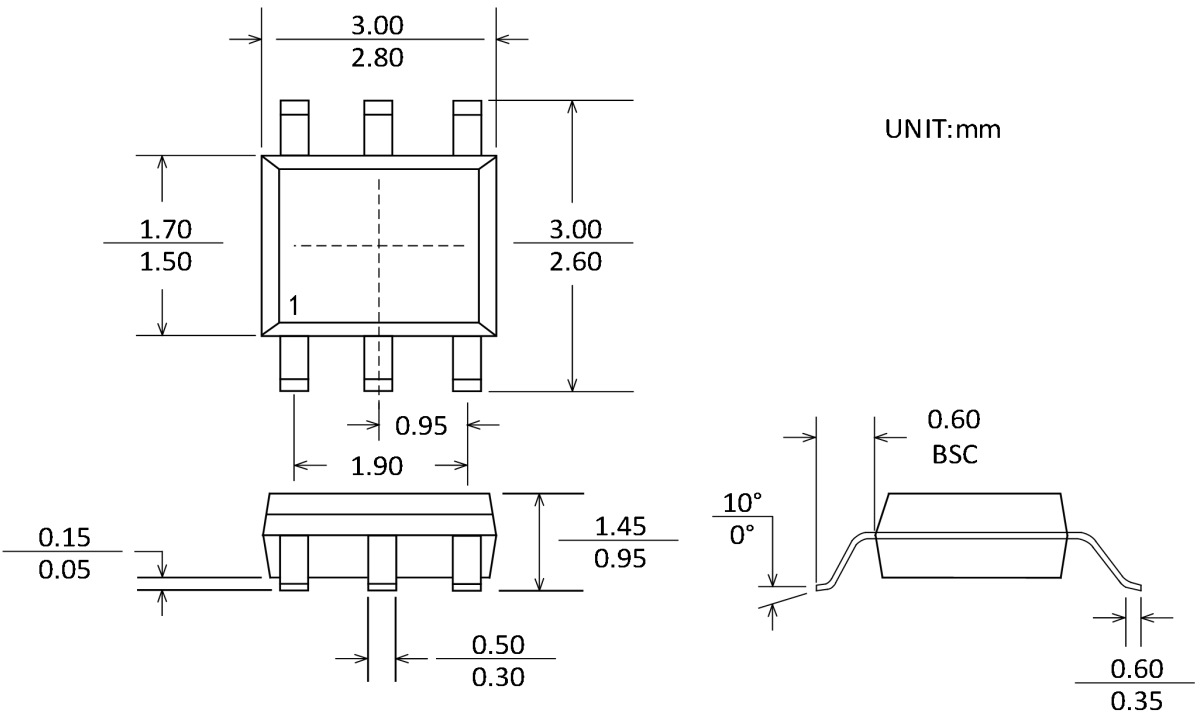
6-Lead Small Outline Transistor Package [SOT-23]
